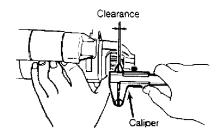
Measuring Pinion Edge-to-Pinion Stopper Clearance
